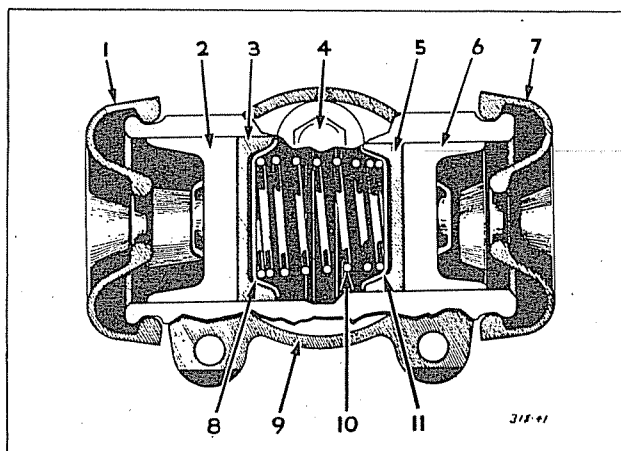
Rear Wheel Brake Cylinder 1-08A Only.
